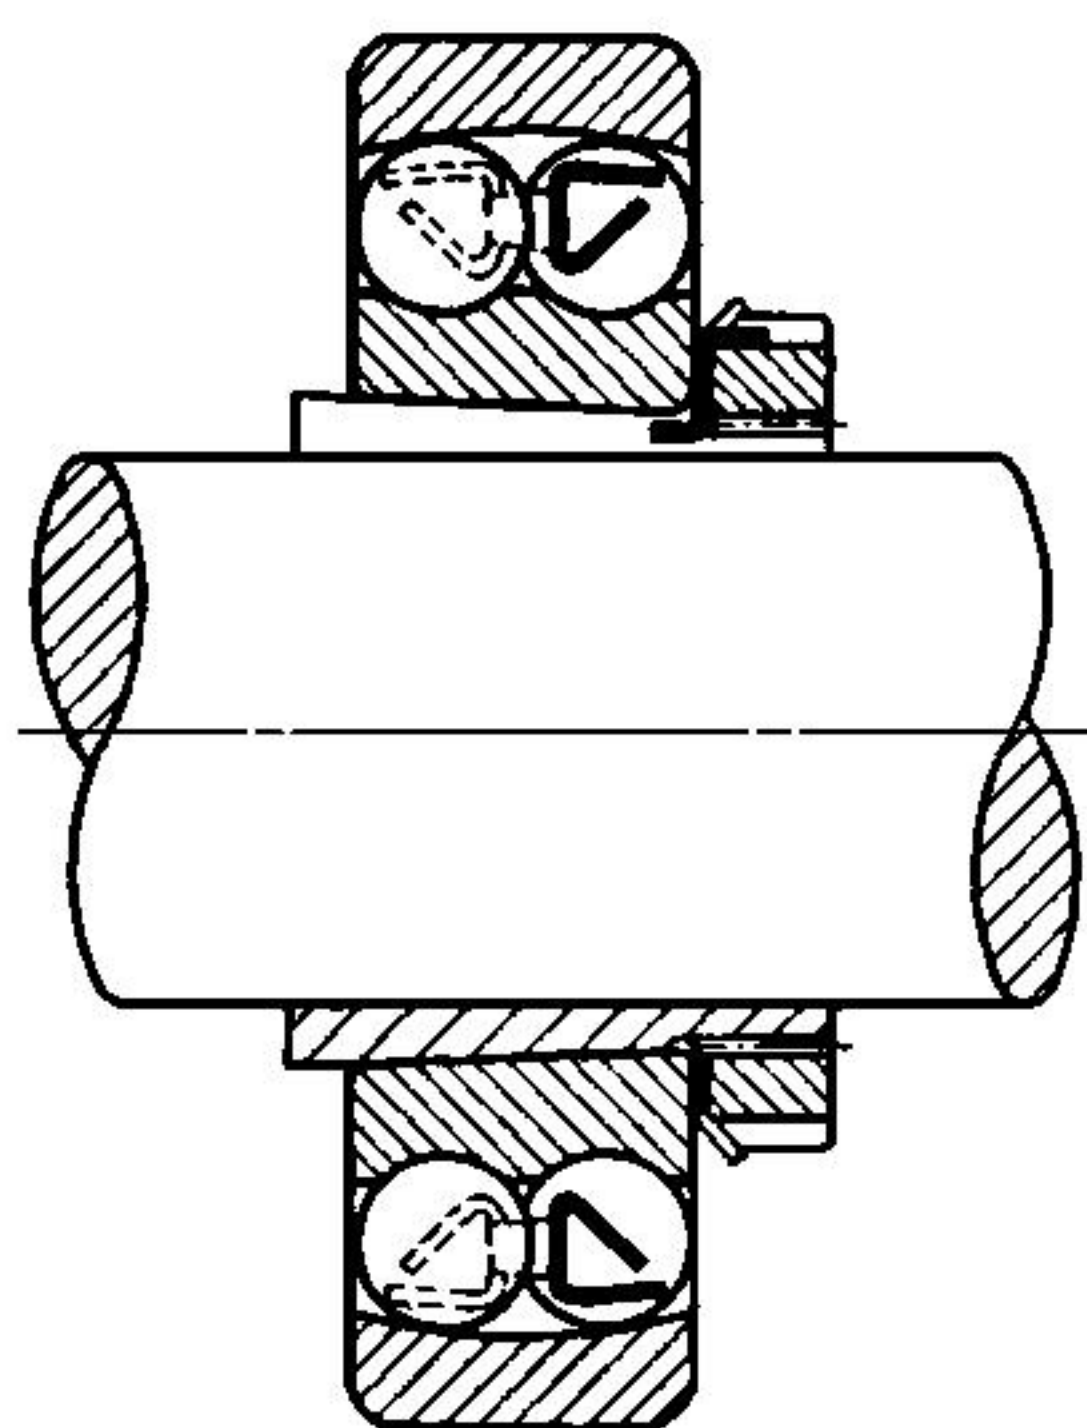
Mounting of a self-aligning ball bearing with an adapter sleeve.
